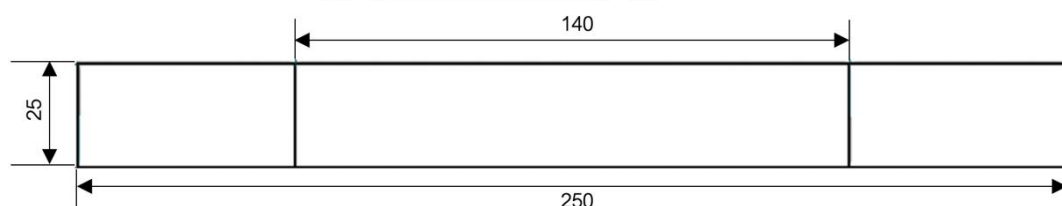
Tensile test specimen according to ASTM D3039 (unit in mm.).
